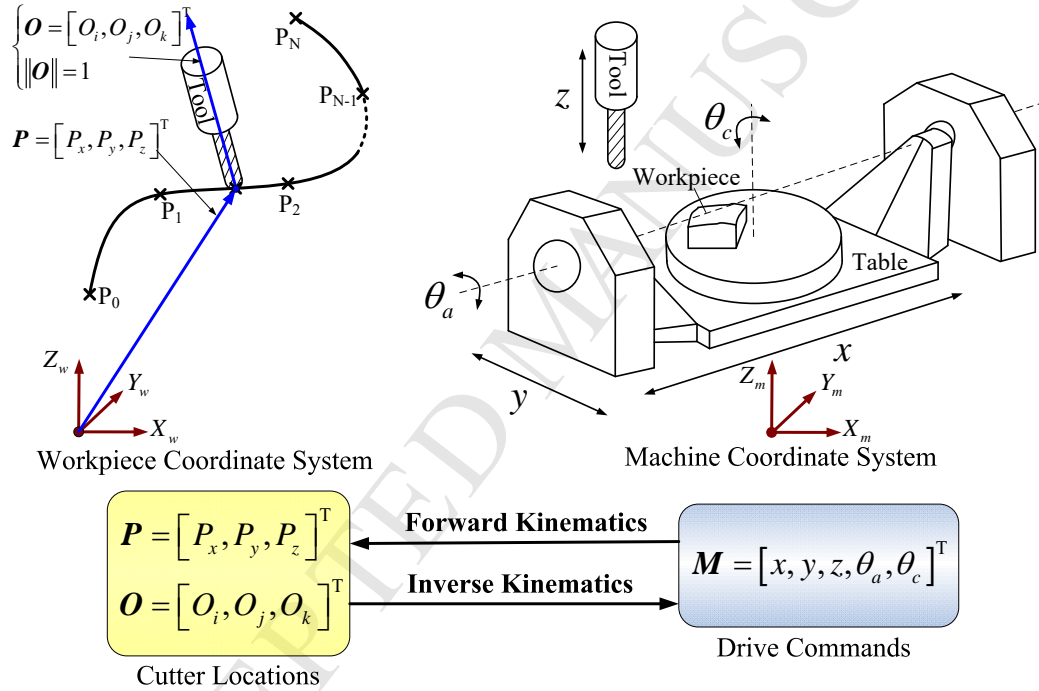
Motion commands in the workpiece coordinate frame and the machine coordinate system [22]
